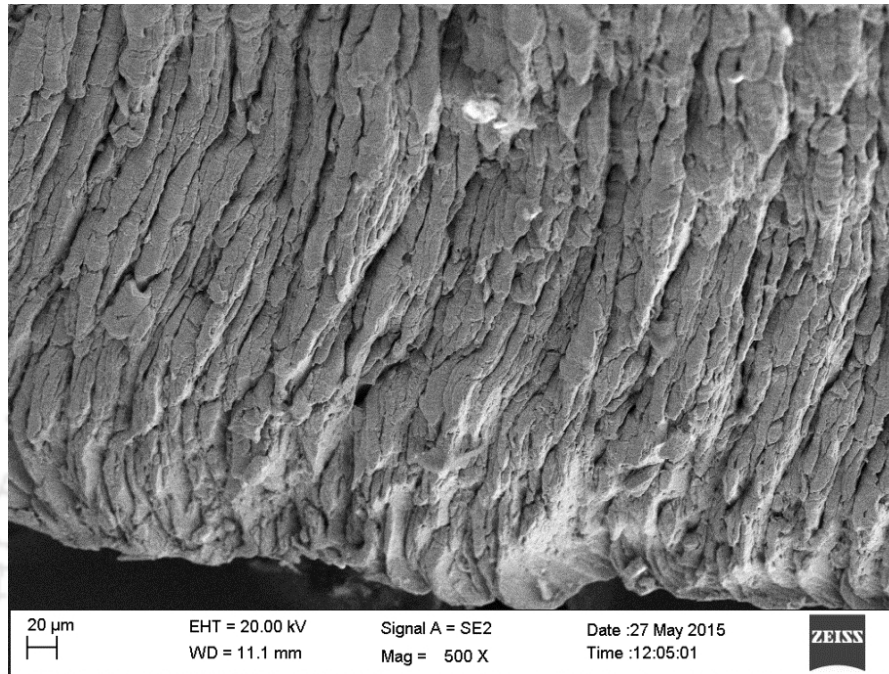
(a) Front surface of the chip produced by WC-Co cutting tool
